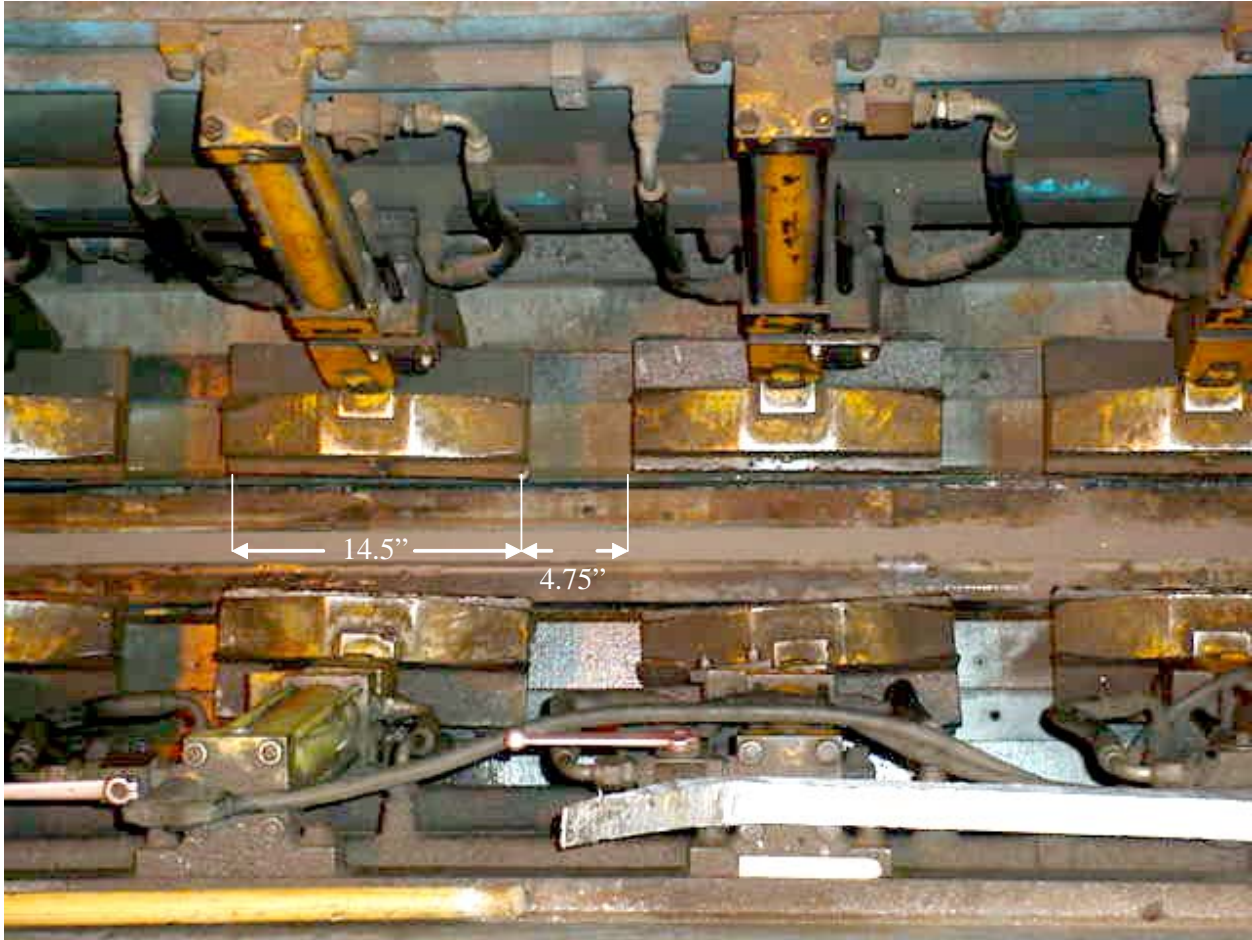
Top View of NGSS - Pascagoula Panel Line Fixture
